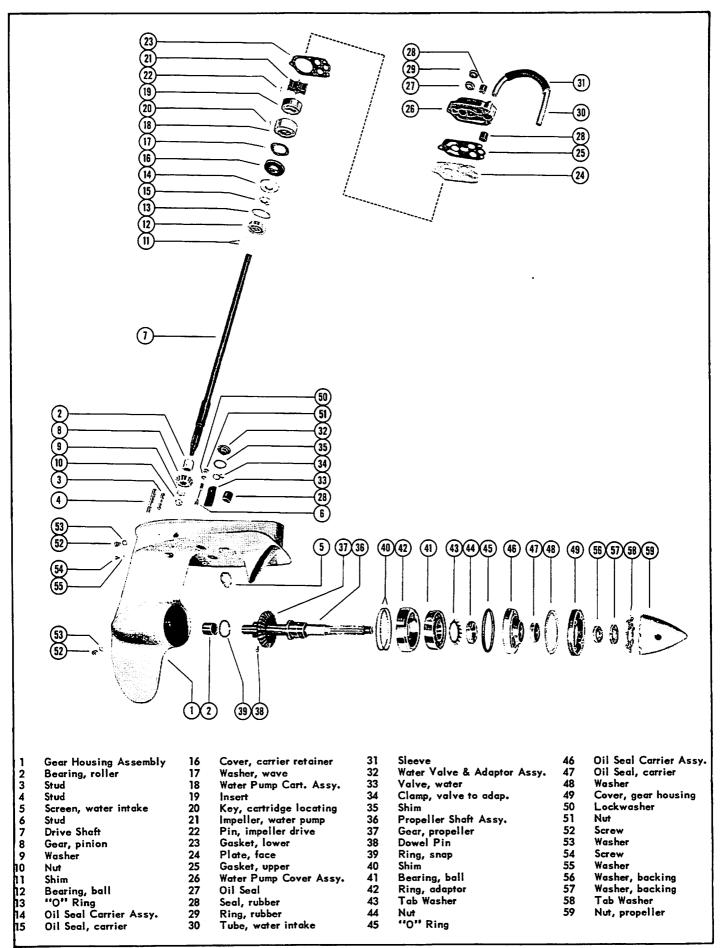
Gear Housing Assembly, Right Hand Rotation -- Merc 600 and Mark 78-78A-75-75A
